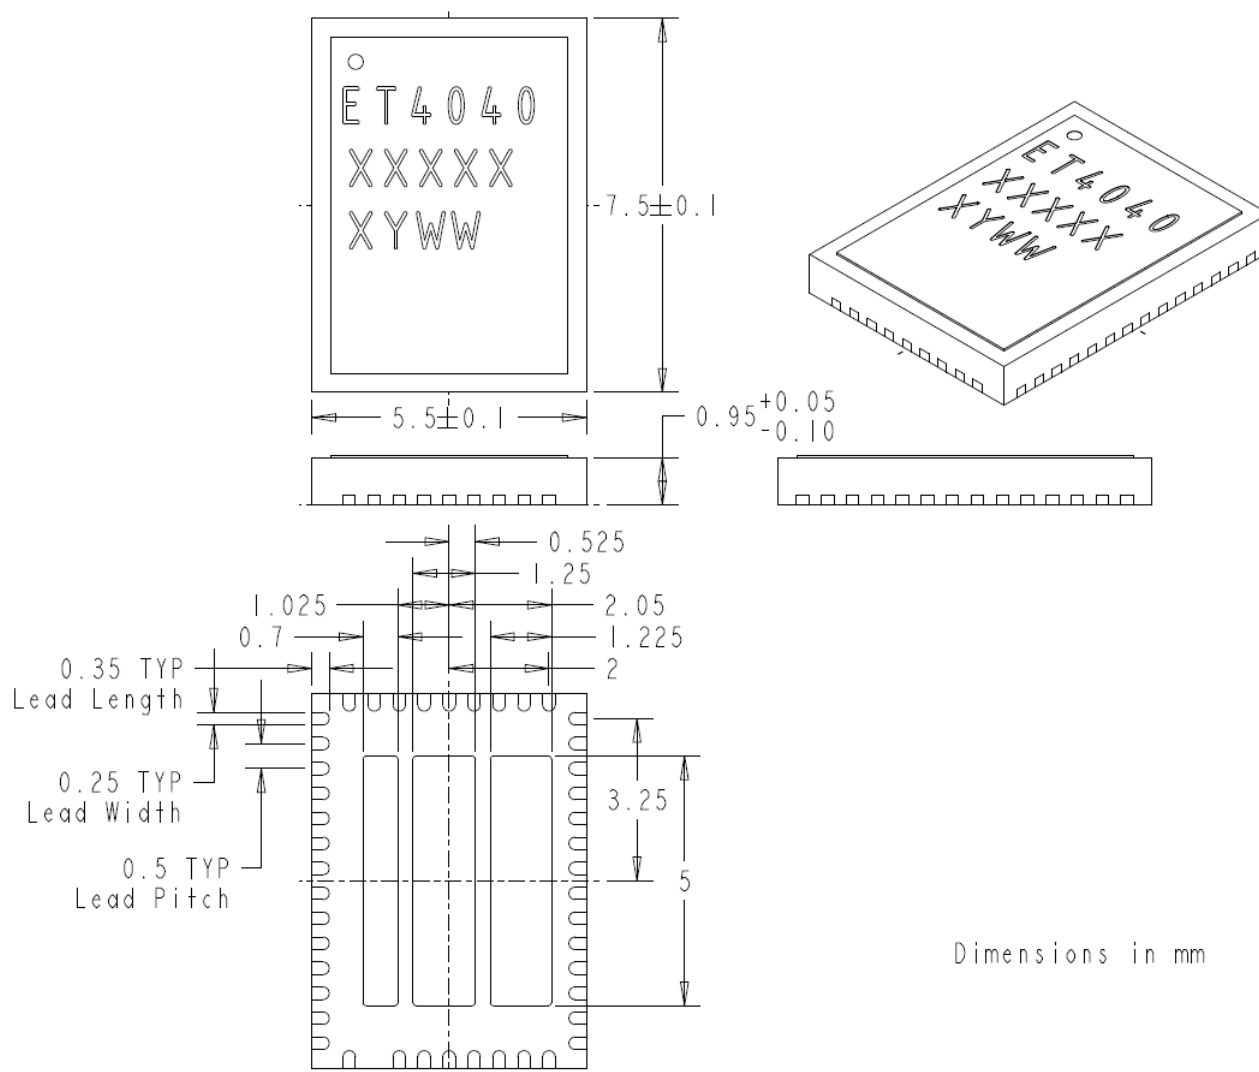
EPT4000QI Package Dimensions (Bottom View)
